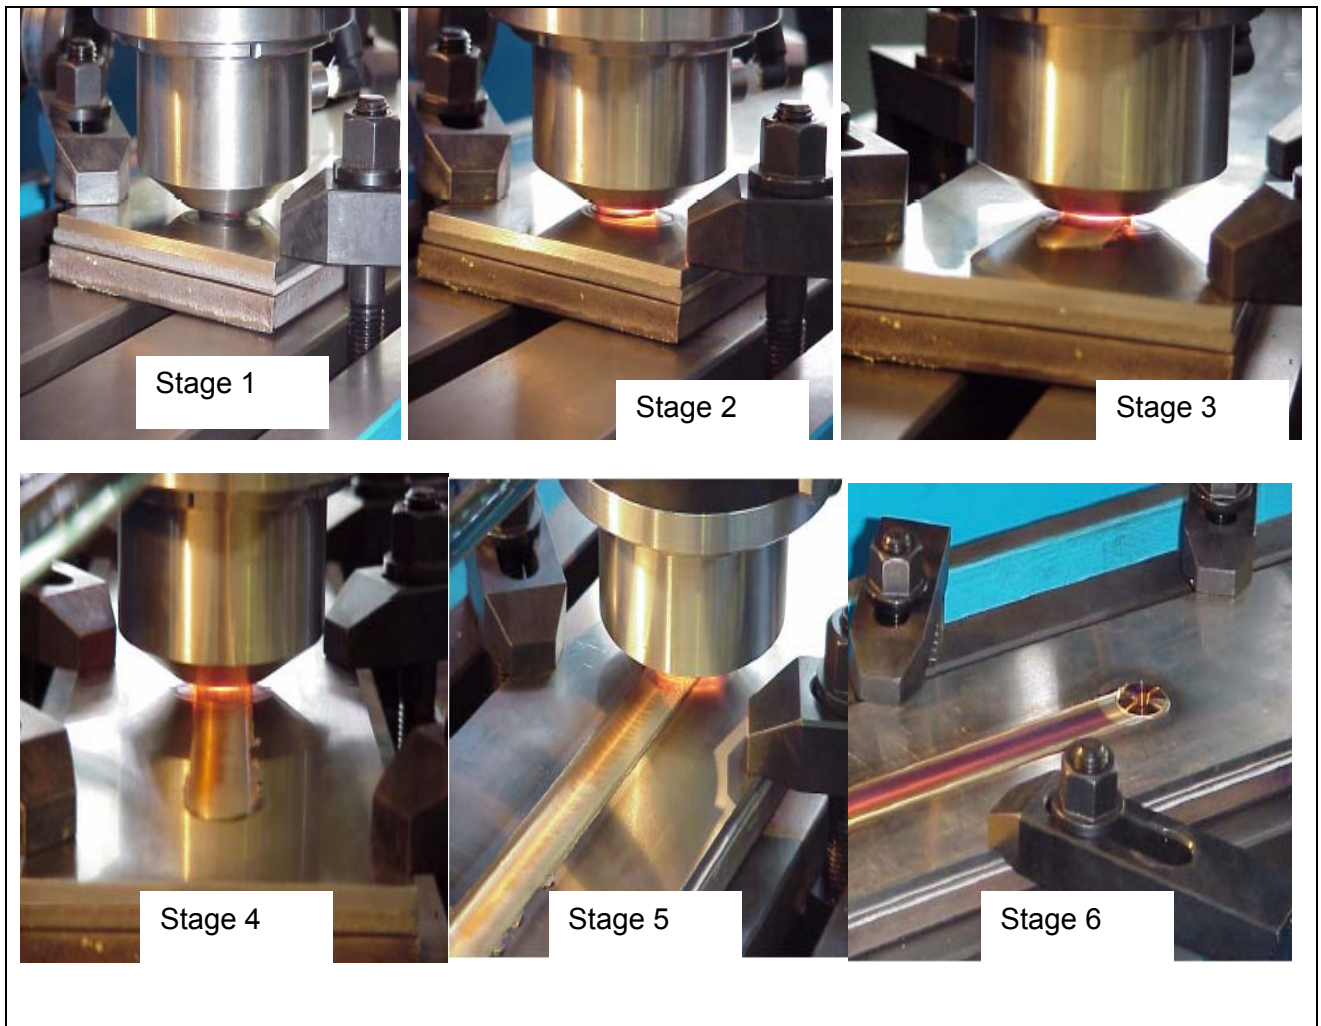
Process of friction stir welding for steel plate.
